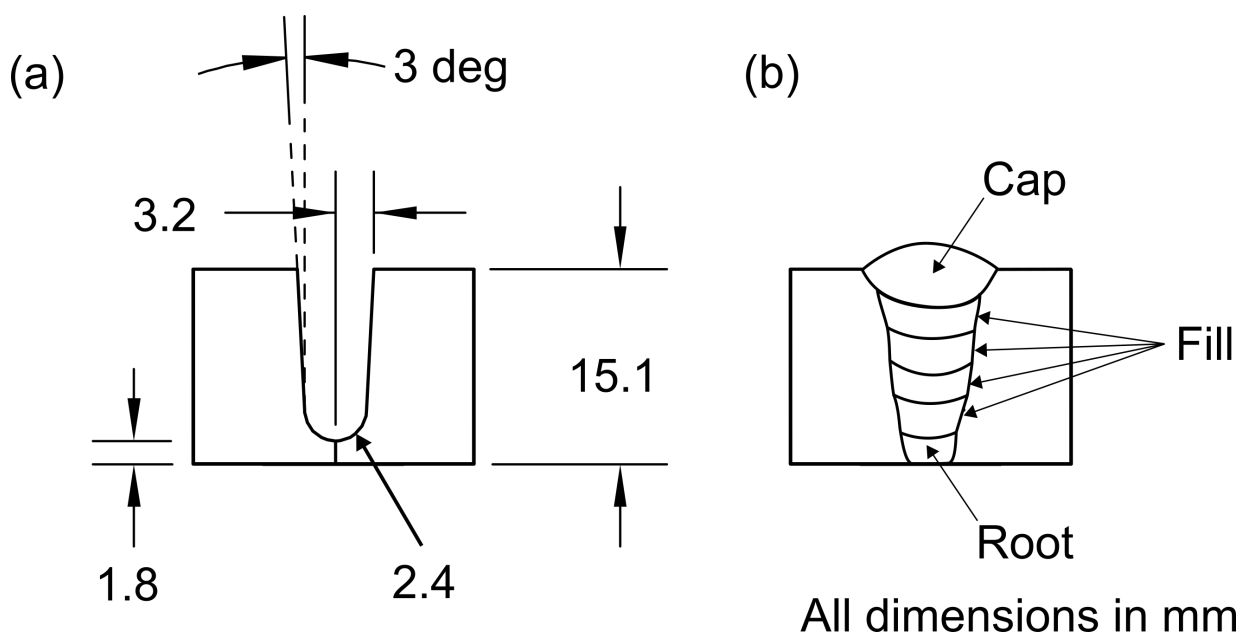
schematic diagram shows a)- The groove design b)- The welding passes sequence.
